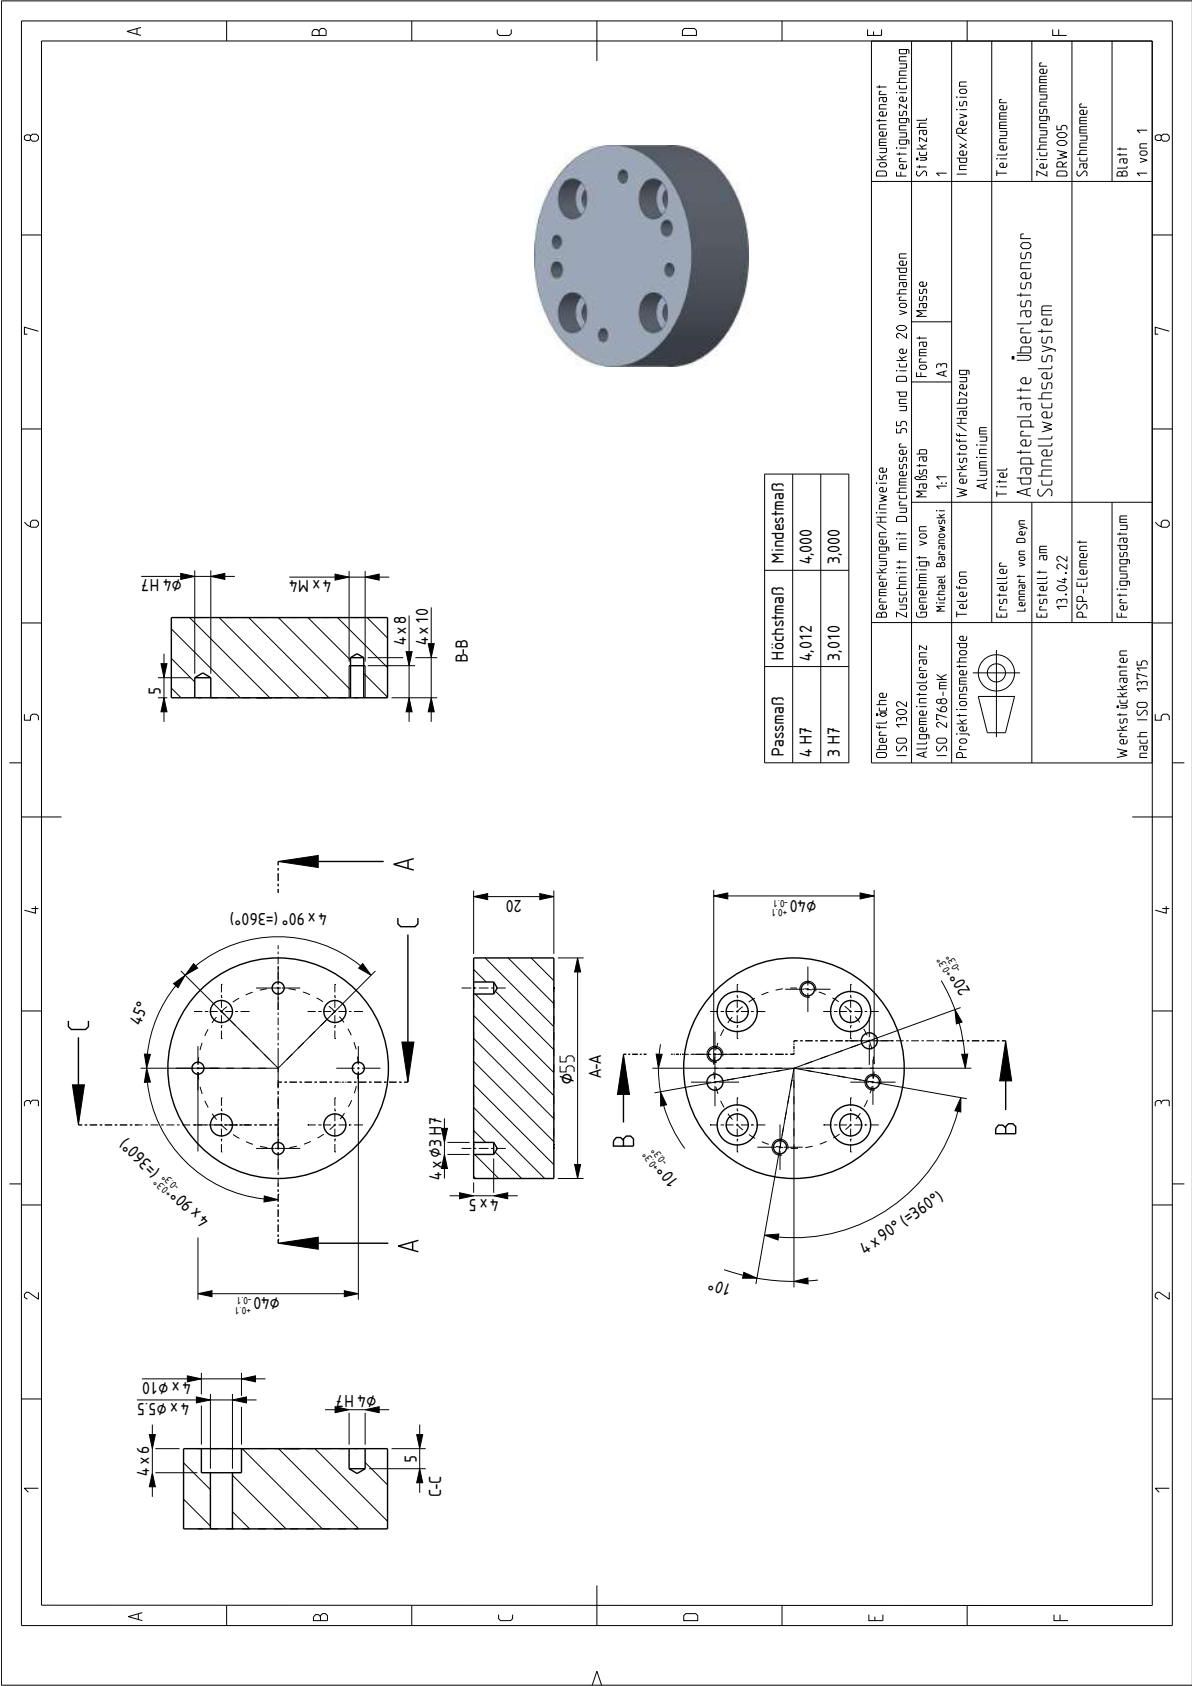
Drawing optional adapter plate quick change system to overload sensor
